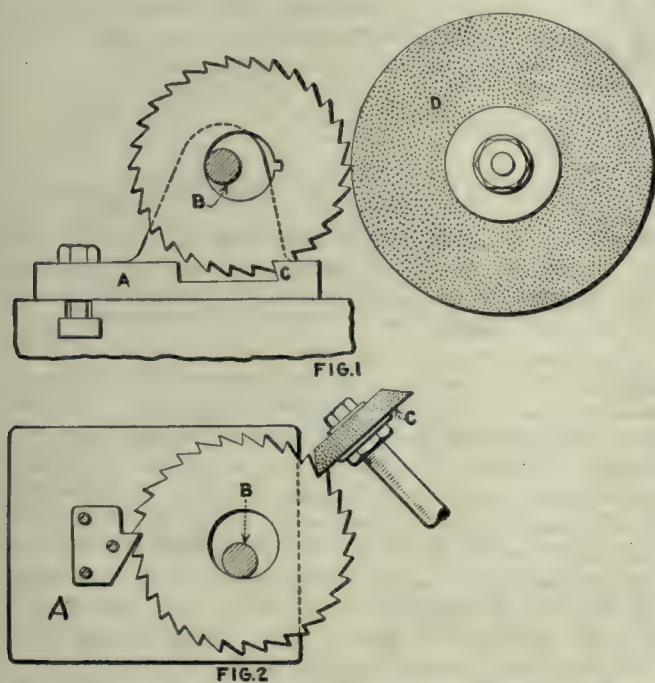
FIXTURE FOR GRINDING CUTTER TEETH. FIG. 2—MODIFICATION FOR GRINDING FACE TEETH
